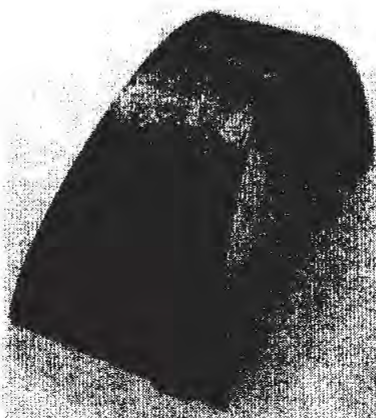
The picture of the geometrically modified bearing. Minimum to maximum length ratio is 0.5
